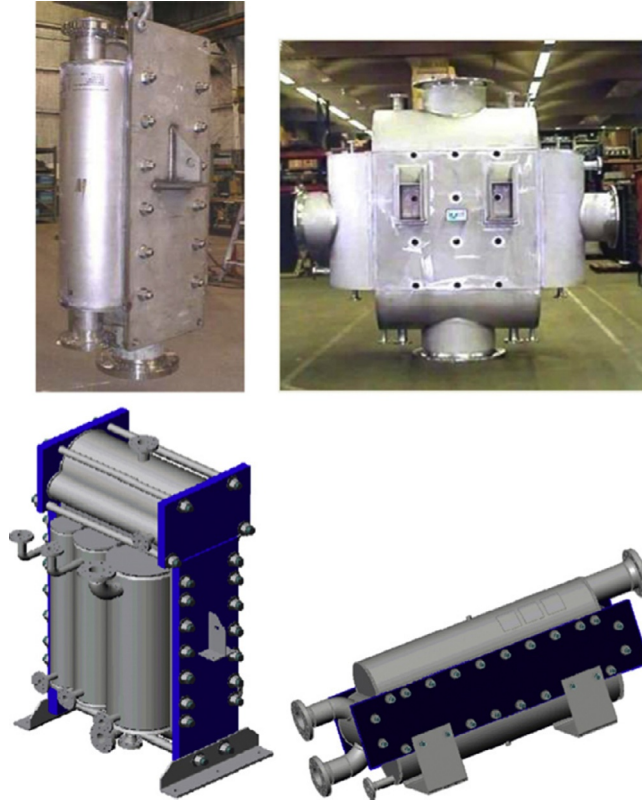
Welded plate-and-frame hybrid design.
